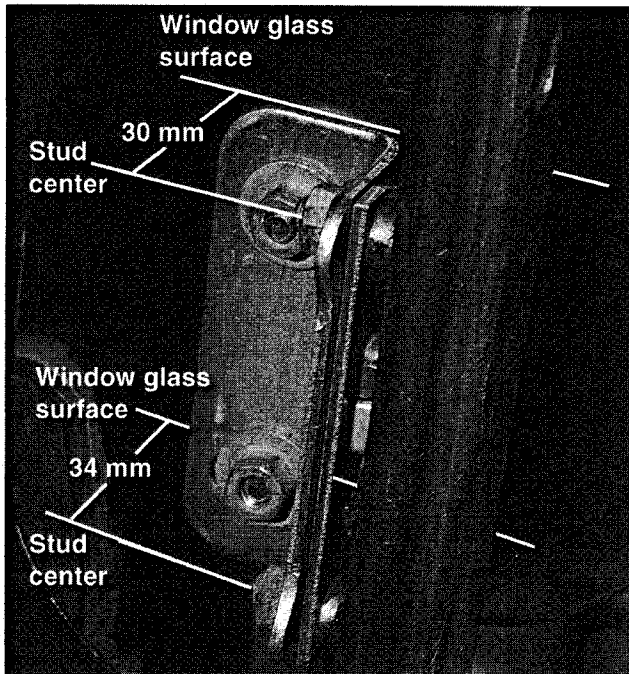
Rear guide rail to rear guide bracket initial adjustment. Top should be set at 30 mm (1.2 in.) from glass to stud center; bottom should be set at 34 mm (1.3 in.) from glass to stud center.
